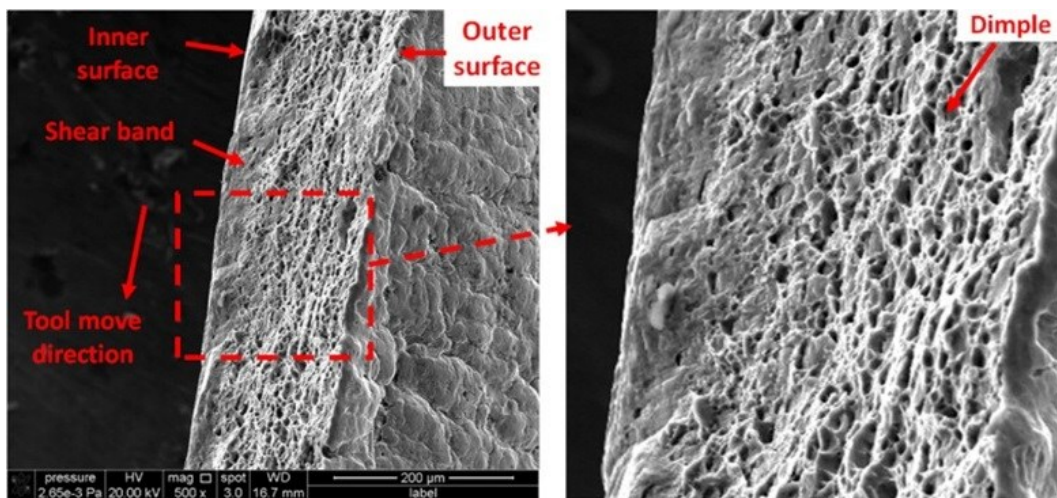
Fractographic analysis at SEM at the crack location of aluminium alloy AA1100 sheet formed applying SPIF [156].
